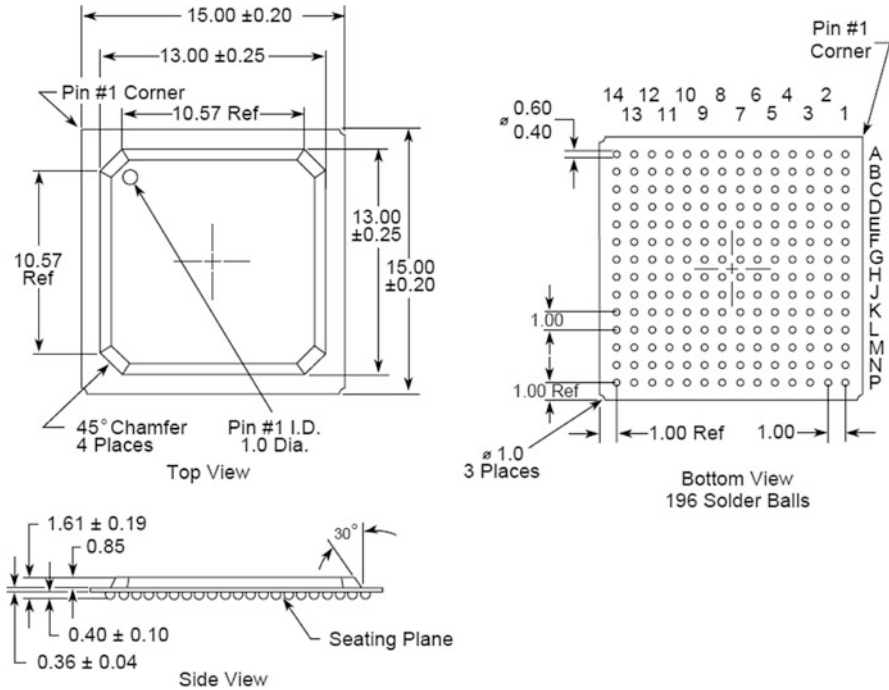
Dimensions of Intel’s 15 mm PBGA outline drawing [11]
